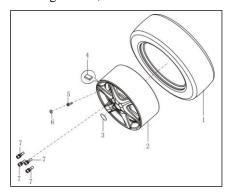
Aluminum Wheel Hub Wheel Assembly
